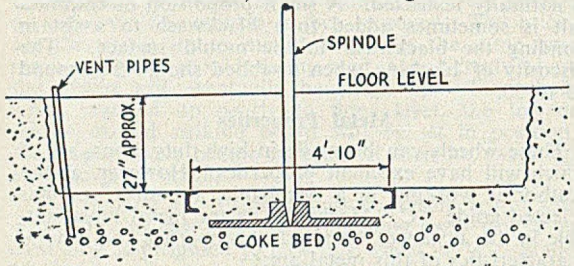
SHOWING THE DRAG HALF MADE IN THE PIT AND THE STRICKLE SPINDLE PLACED INTO THE CROSS-ARM, FOR THE CASTING OF THE H-ARM WHEEL IN BRONZE.
